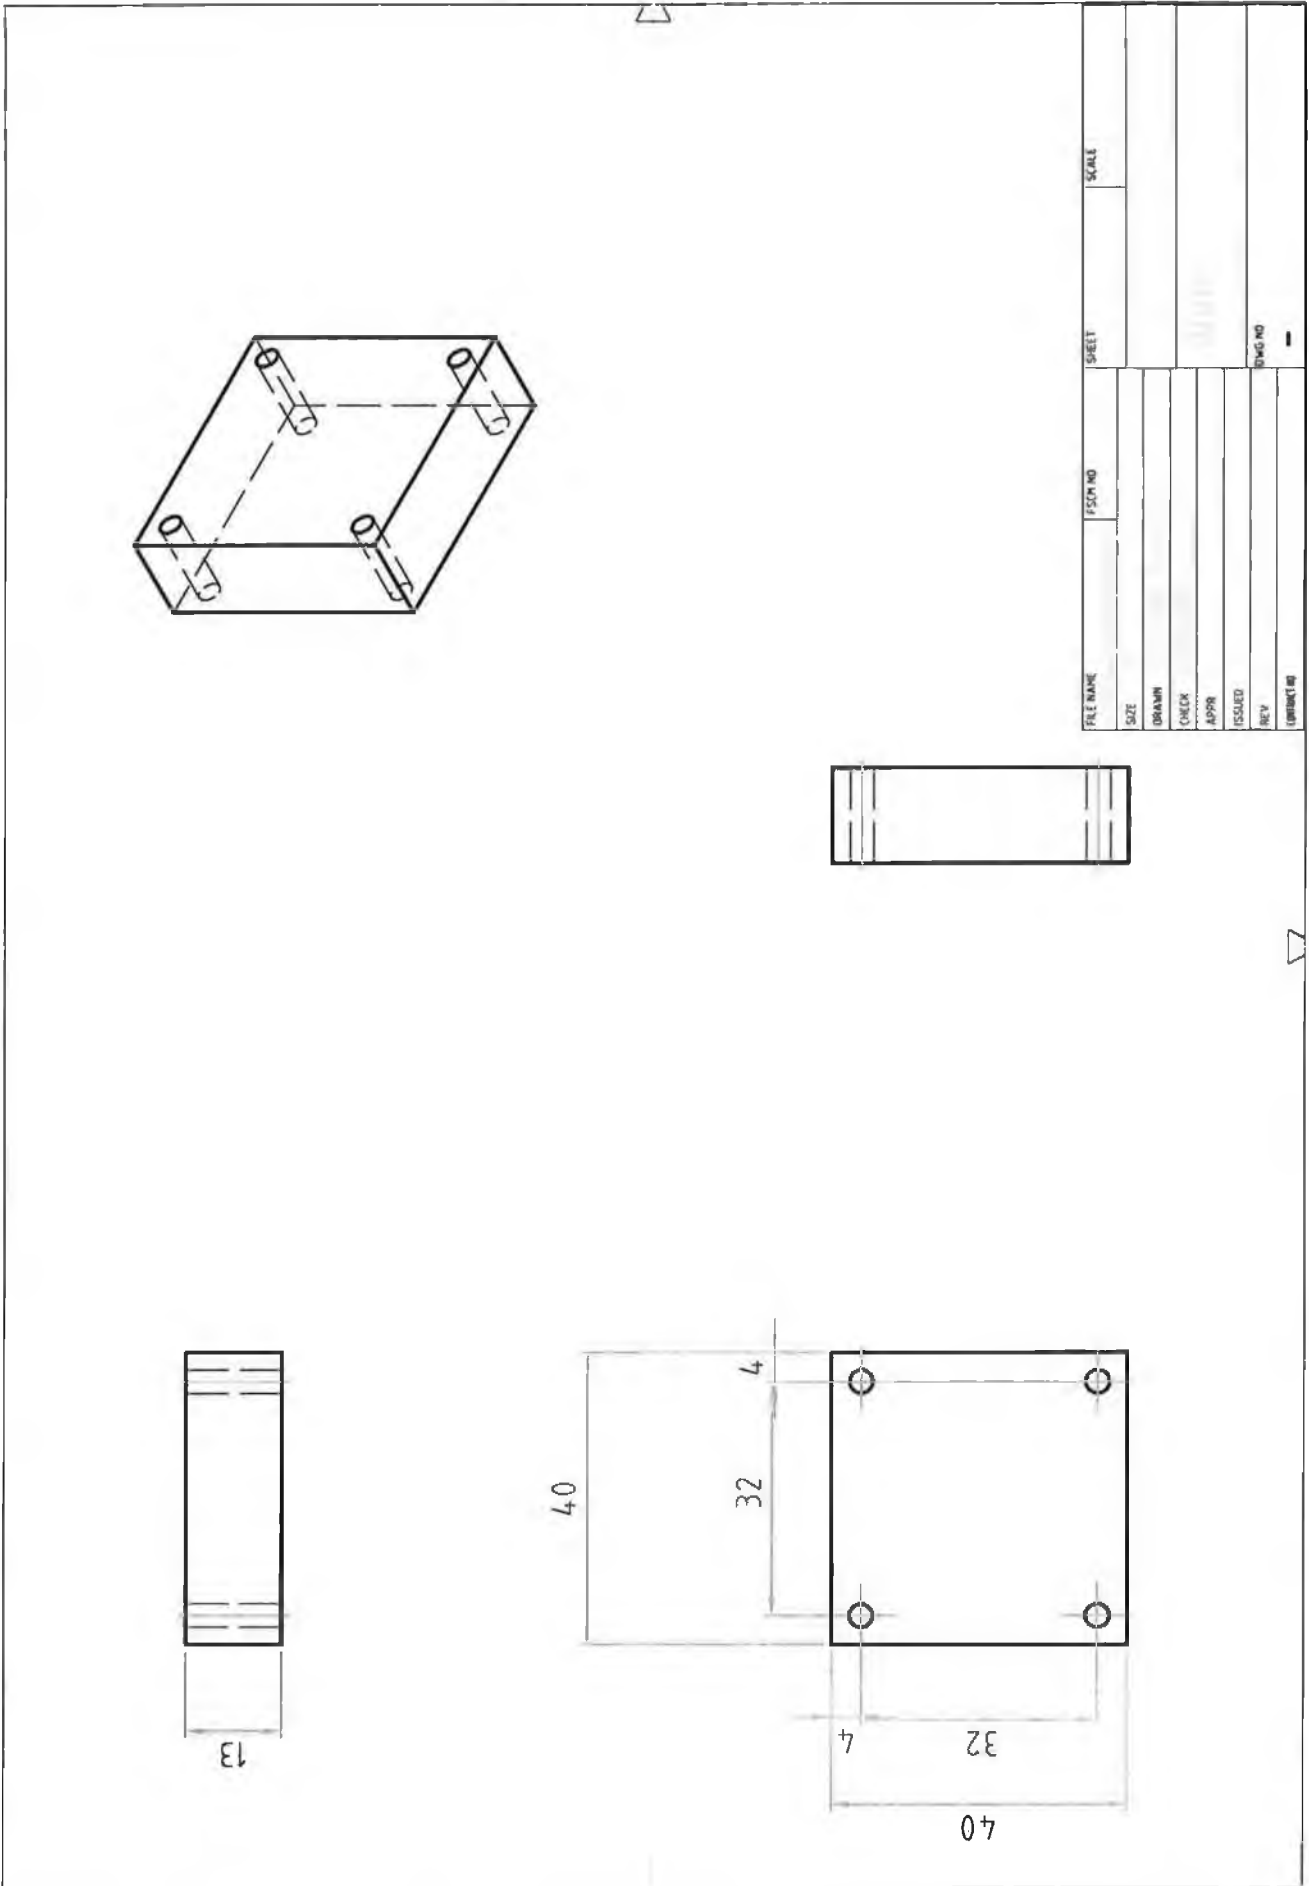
Detailed drawing of Focusing Stage mounting block
